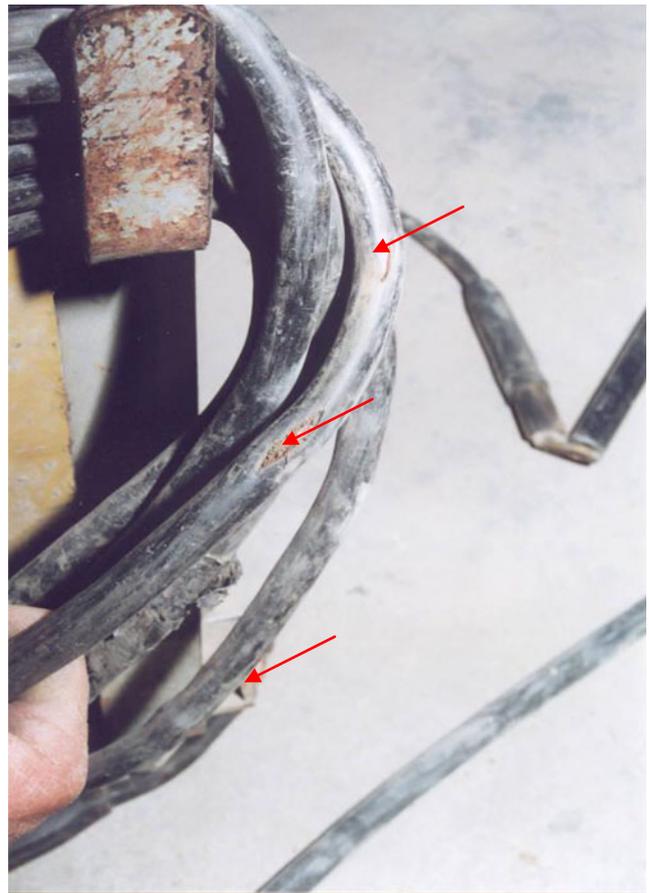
Signs of stray welding current are seen in this picture. This electrical circuit was part of the building electrical system, but not a part of the electrical circuit feeding the welding machine
